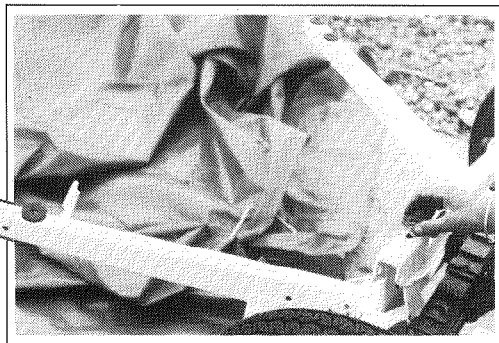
Make sure that the rear tub mounting pads are fitted, not forgetting the thick alloy spacers on top of the chassis crossmember.
